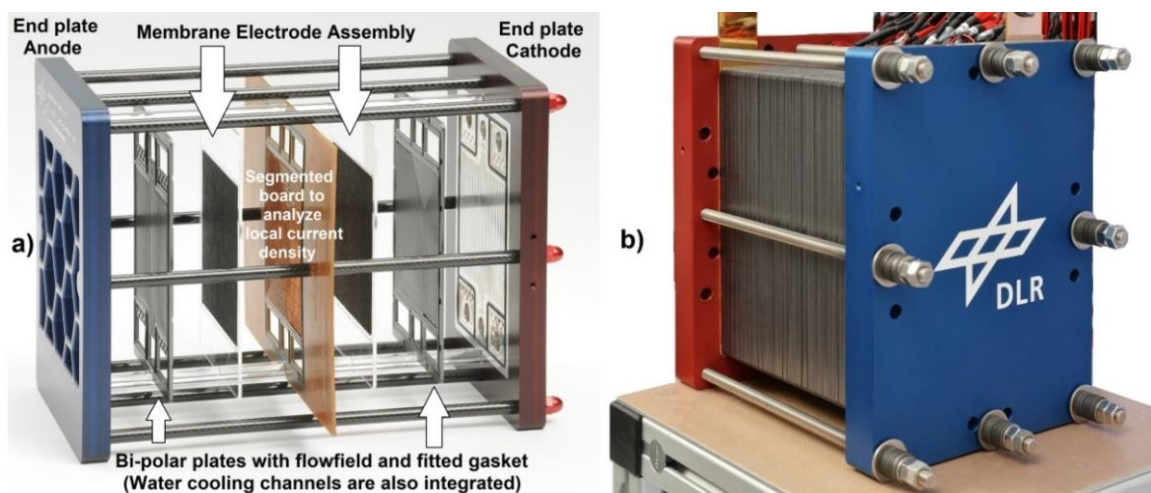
a) Exploded cell view of a DLR PEMFC stack configured with segmented board, b) a finished PEMFC stack produced by DLR ready to operate.
